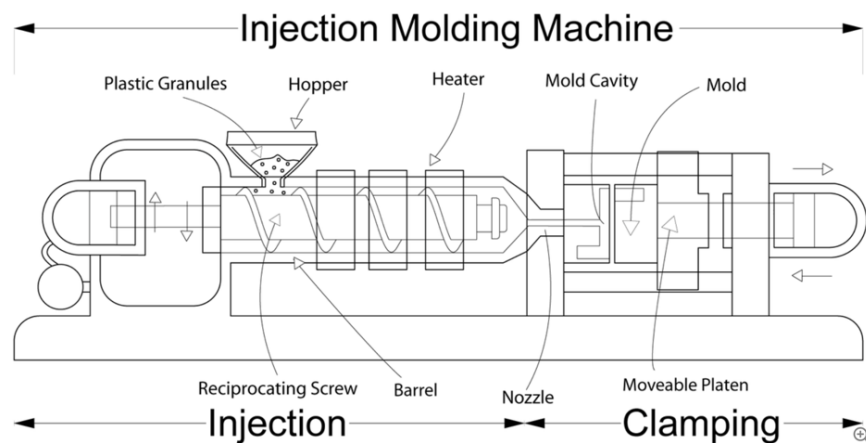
1: Scheme of an injection-molding machine.^[15]
